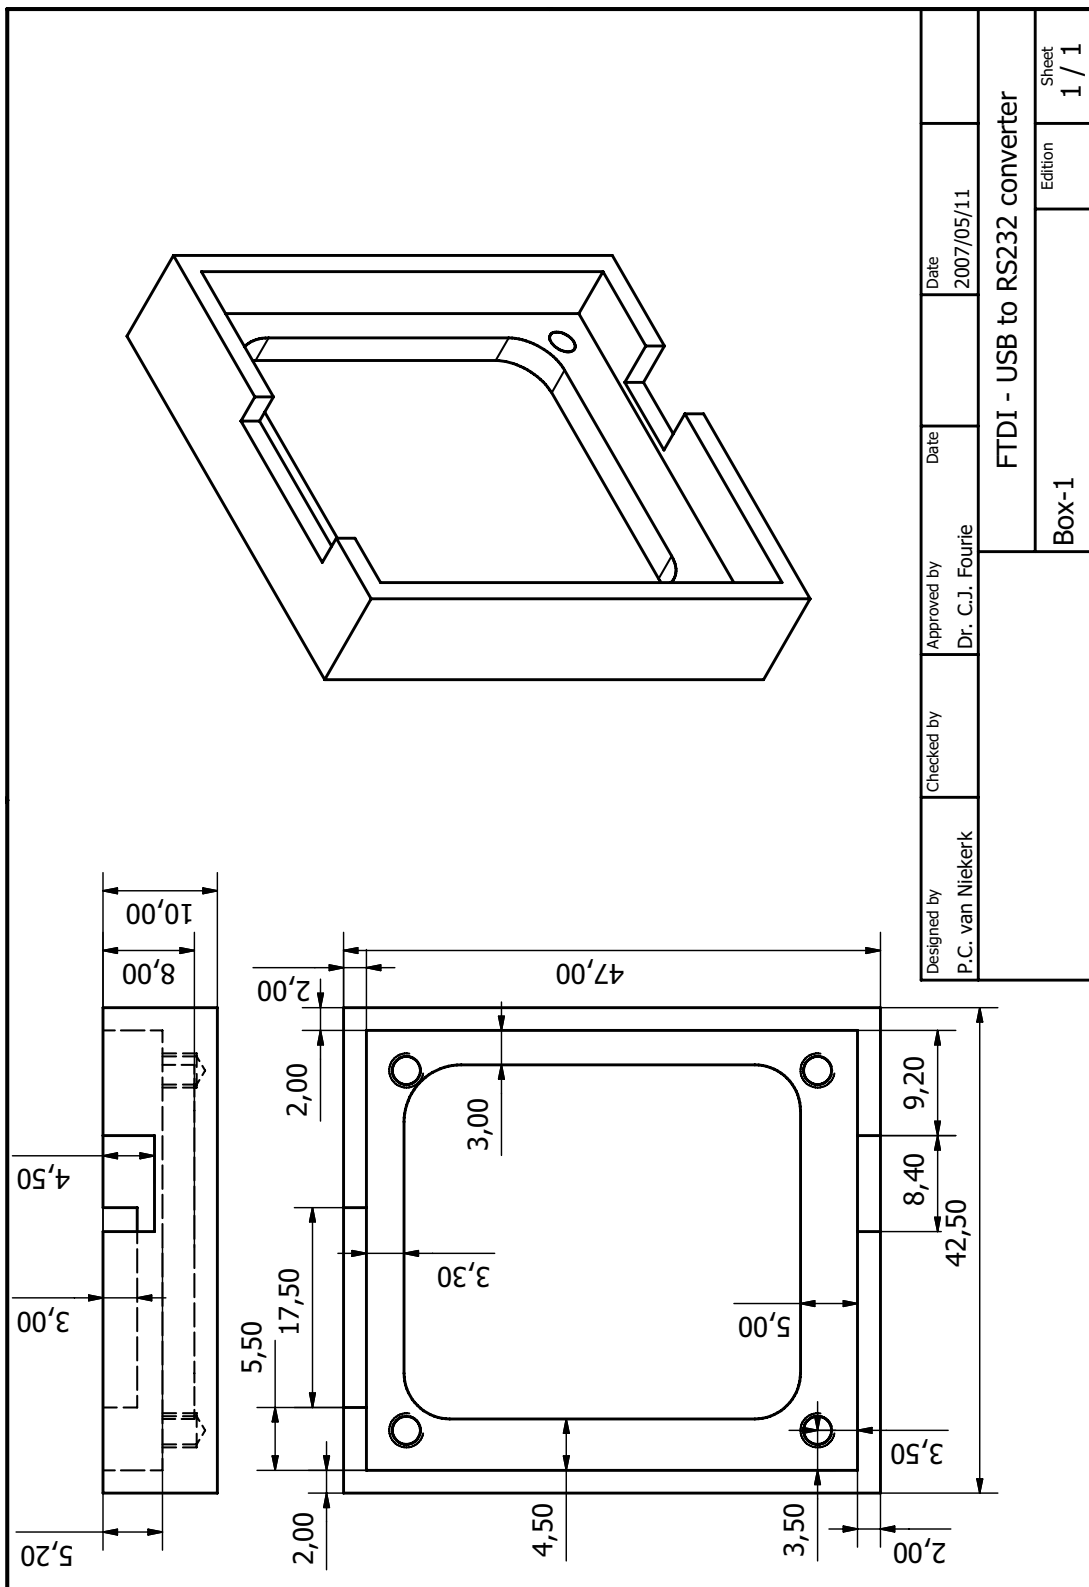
The bottom part of the *FTDI USB-RS232* fibre optical converter box, containing the PCB in Fig. A.16.
